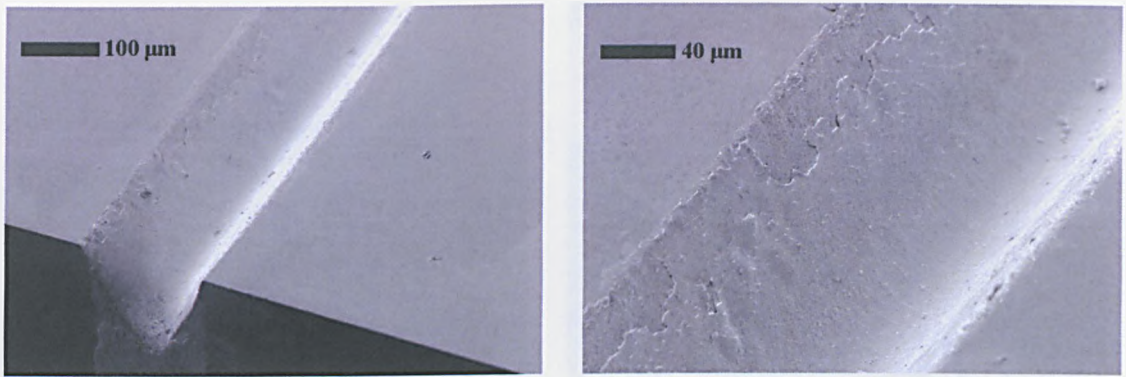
Laser micromachined fibre positioning V-grooves in x-cut LiNbO_3 using optimum processing conditions.
